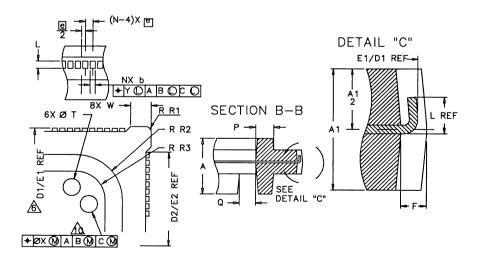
Molded carrier ring QFP, 256-lead customer package outline (3 of 4)
